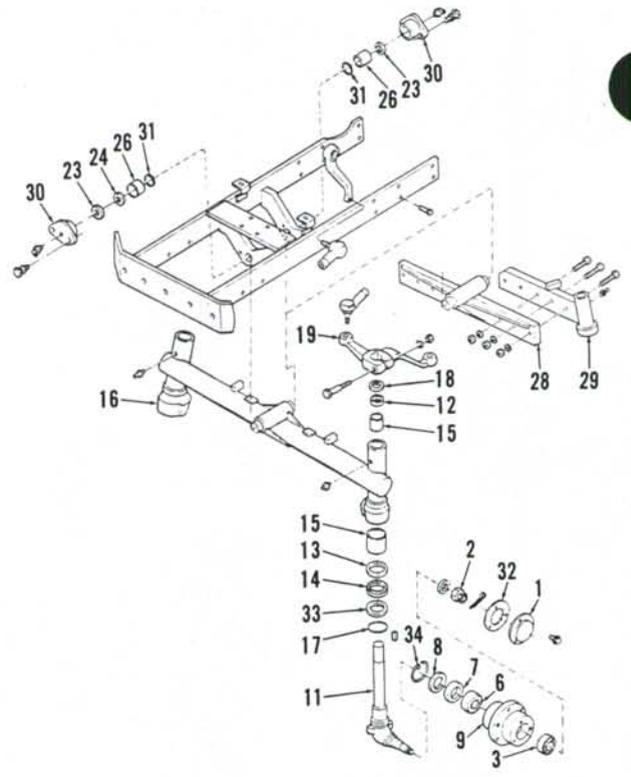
Exploded view of adjustable front axle used on 1700, 1710, 1900 and 1910 models with two wheel drive. Refer to Fig. 3 for legend except for the following:
